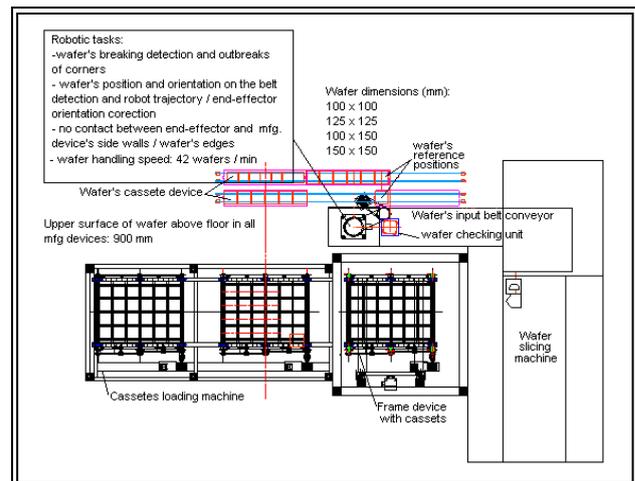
Generic layout of wafer's flexible manufacturing line (partially view) including: wafer slicing equipment and transporting system - belt conveyor, robotized FMC for wafer diagnosis & loading into "cassettes" processing device, conveyors and special purpose machine for "cassettes" loading into "frame" processing devices
